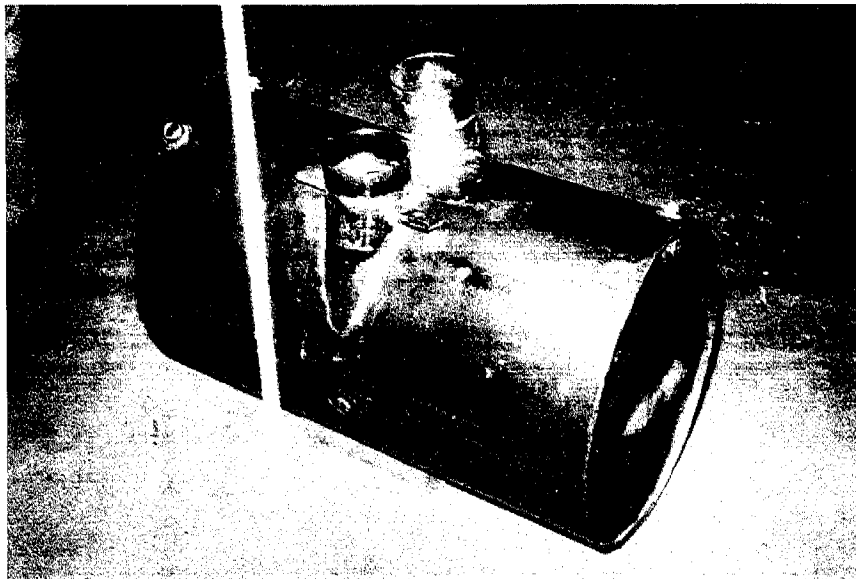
COMPLETED TRAP ASSEMBLY READY FOR FITTING
